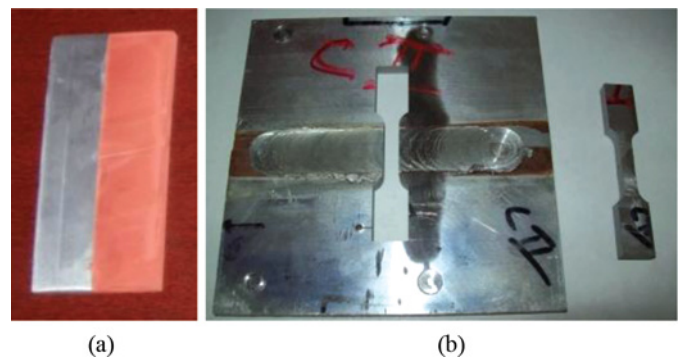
(a) Copper coated aluminum alloy workpiece. (b) Top side of weldment. (c) Extracted tensile test specimen (color figure available online).
